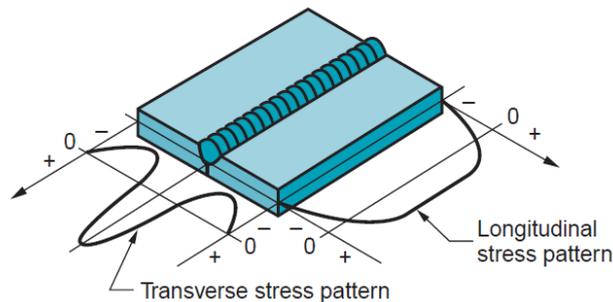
Longitudinal and transverse stress pattern after a butt-welding operation [4]
